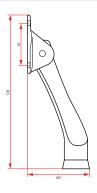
DETAILS Material: 304 stainless steel Fixings: 1x 8g 30mm CSK timber screw SSS
